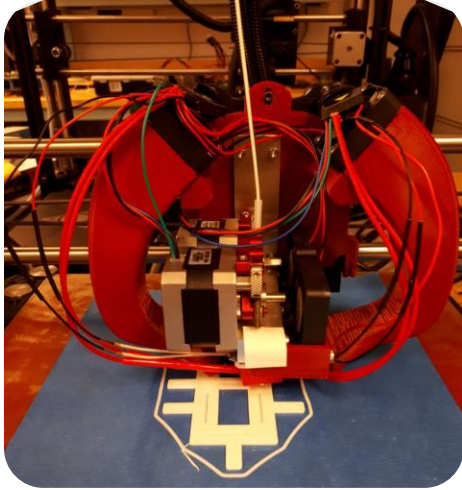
3D printing manufacturing process of pneumatic actuators.
